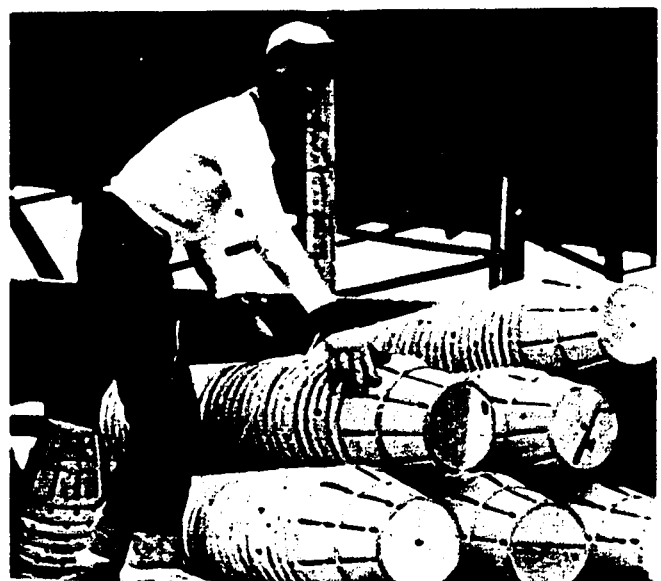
Staples were used to assemble the parts of these baskets.
